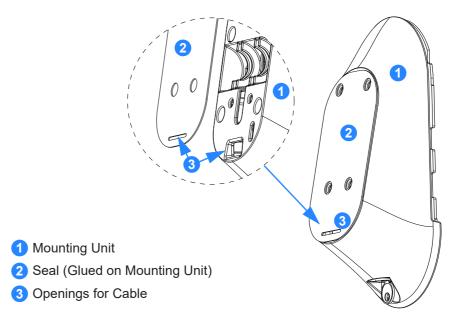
Rear of Mounting Unit with Bonded Seal
